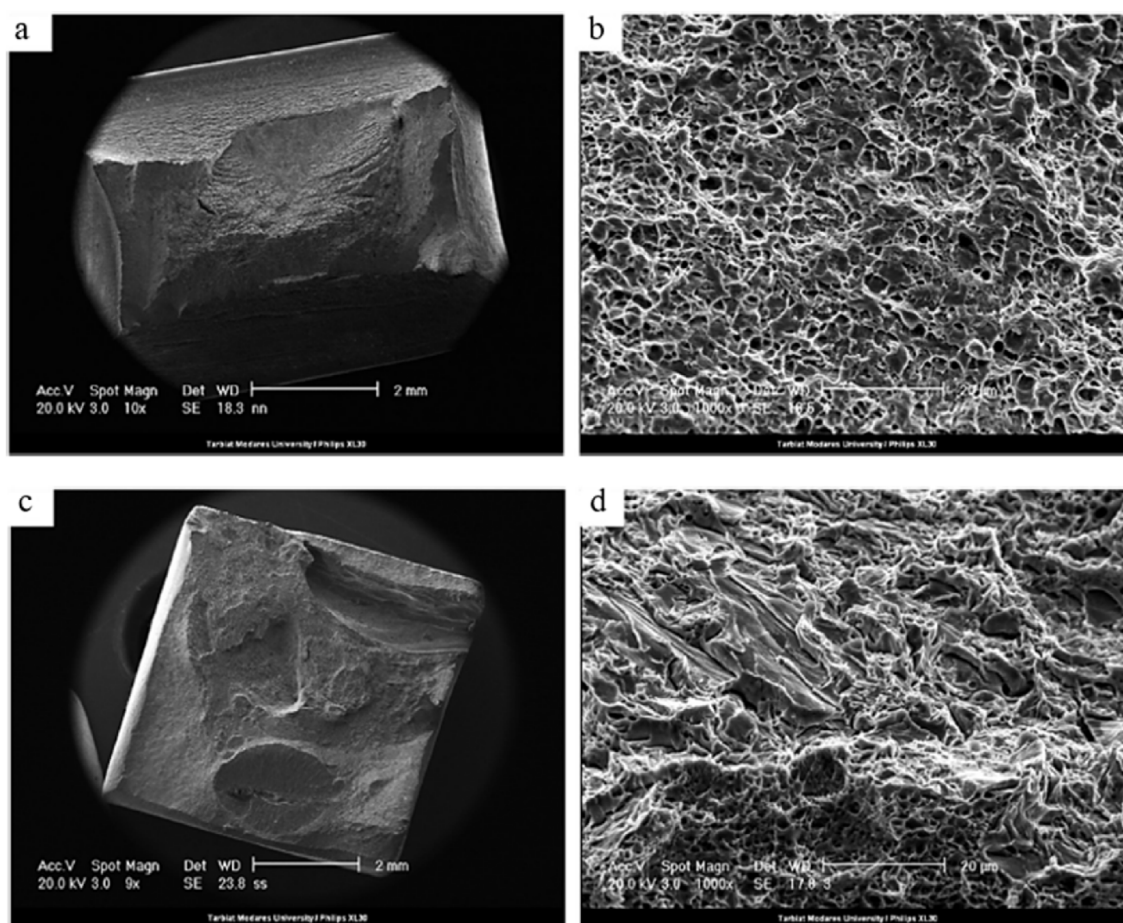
SEM magnified fracture surface of an X65 steel weld uncharged (a) macroscopic and (b) microscopic, and hydrogen-charged (c) macroscopic and (d) microscopic [72].
